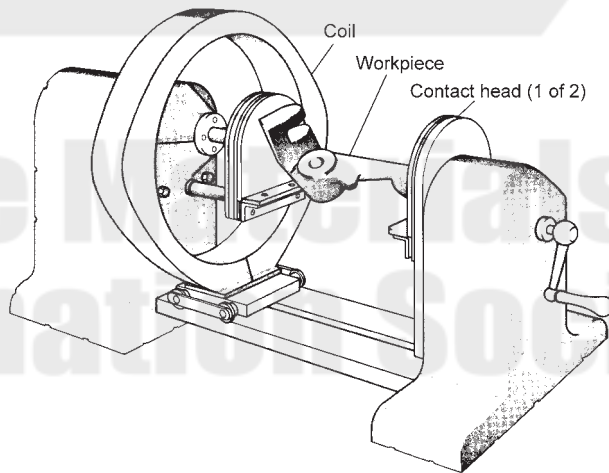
Bench unit used to circularly magnetize workpieces clamped between contact heads (direct contact, head shot method). The coil on the unit can be used for longitudinal magnetization. Source: Ref 2
